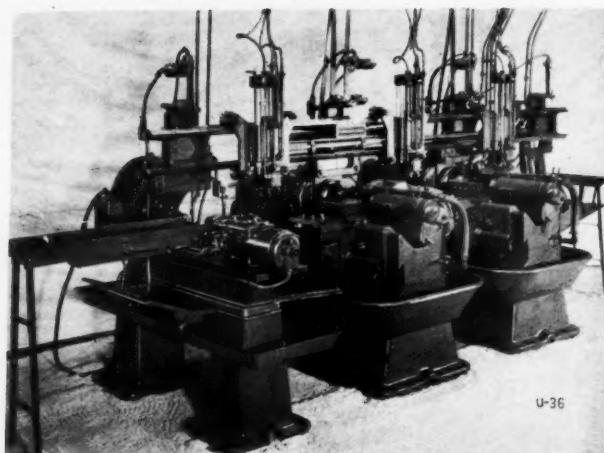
Standard machines are employed in a continuous production unit incorporating automatic loading
